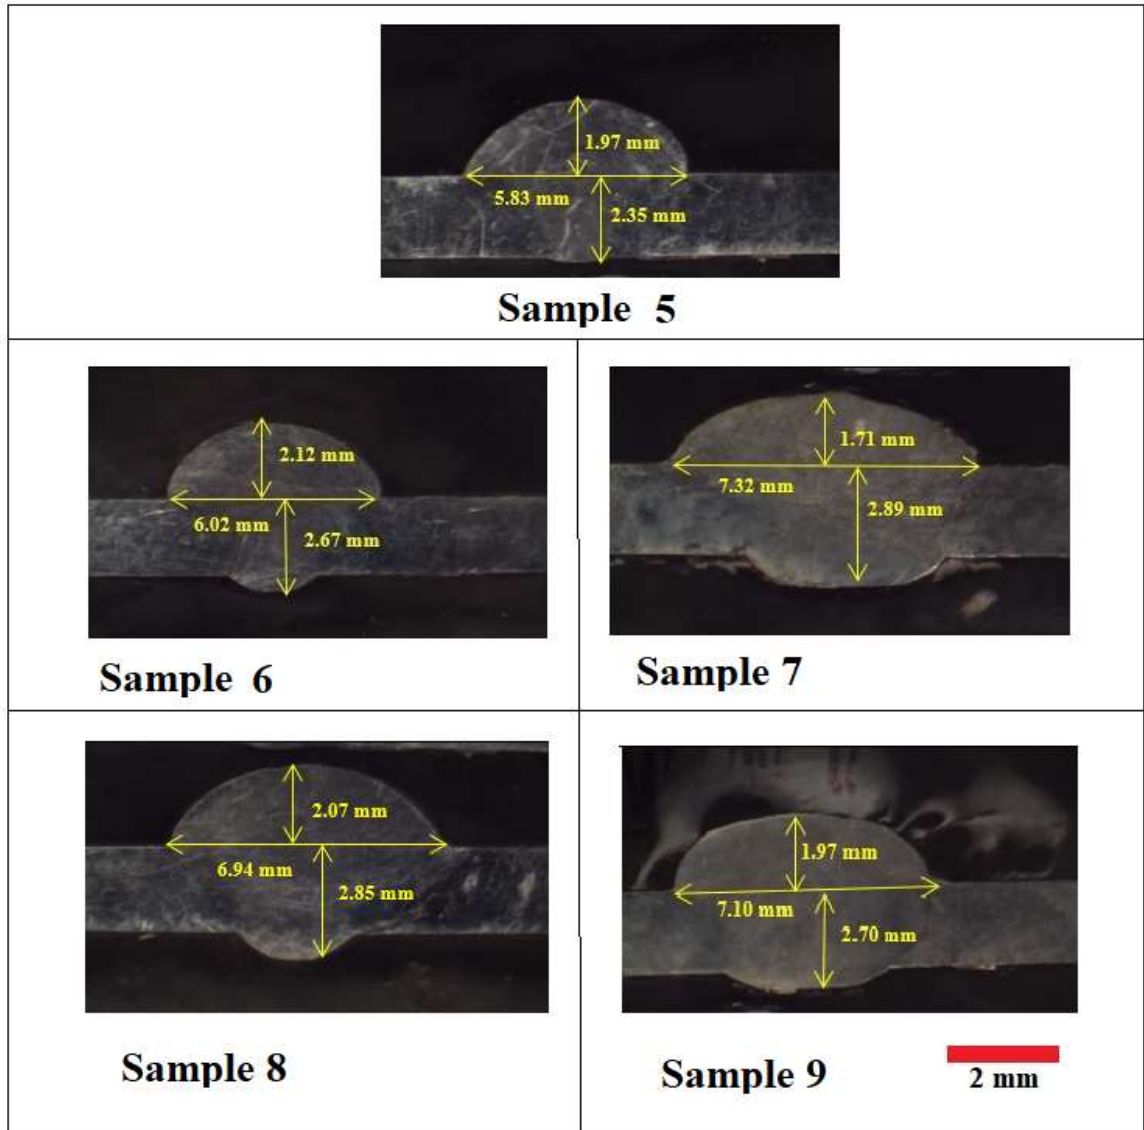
Macro-images of CMT weld bead samples S5 to S9
